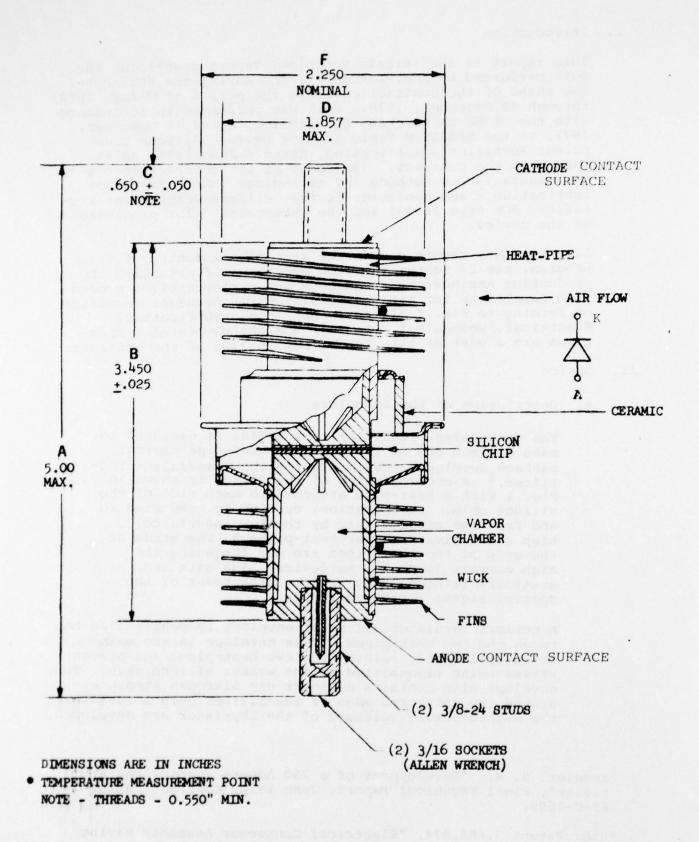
Transcalent Rectifier Type J15401 Cross-Section Drawing
